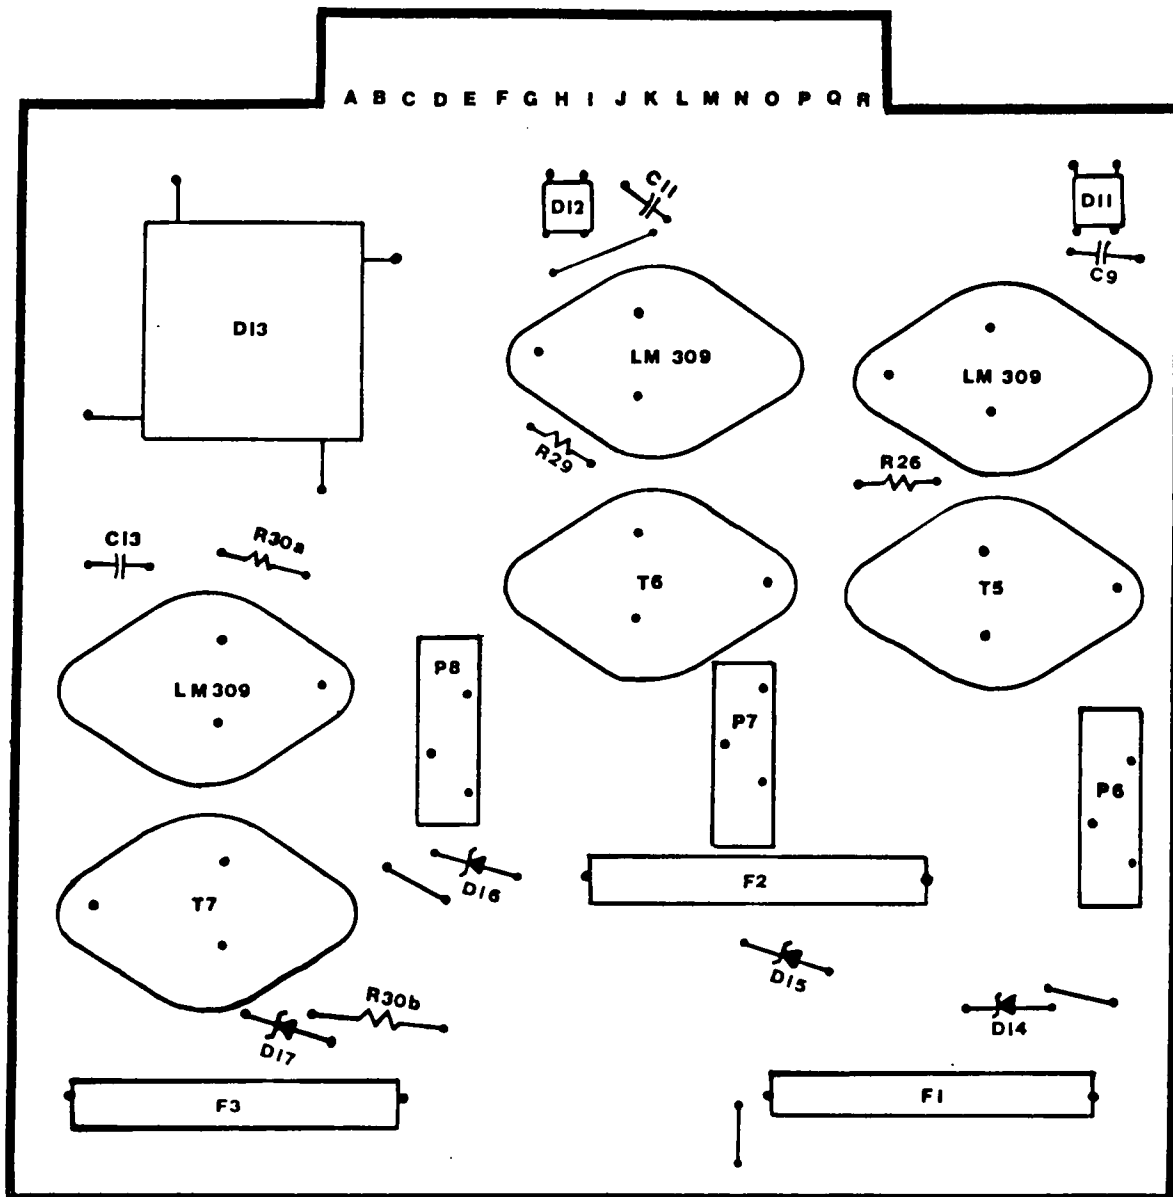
COMPONENT SIDE OF POWER SUPPLY BOARD
